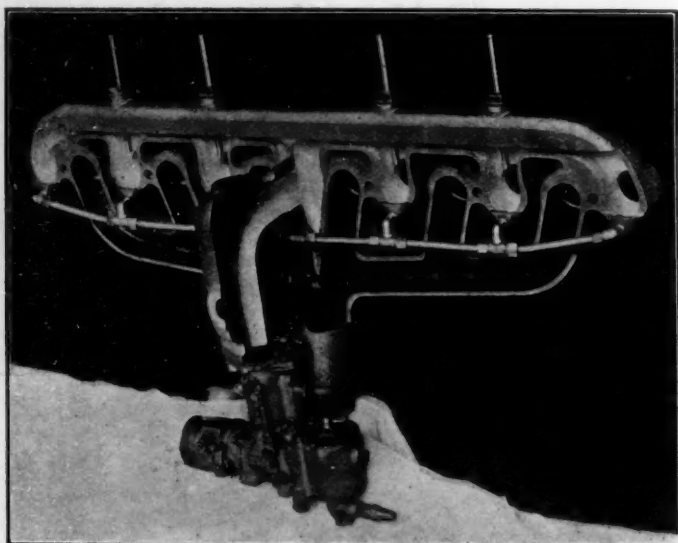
ANOTHER VIEW OF THE ADMISSION PIPE SHOWN IN FIG. 3 WITH ONE-HALF REMOVED TO SHOW THE PIPE EMPLOYED TO RETURN THE HEAVY FUEL ENDS TO THE CENTER POCKET OR VAPORIZING STILL
